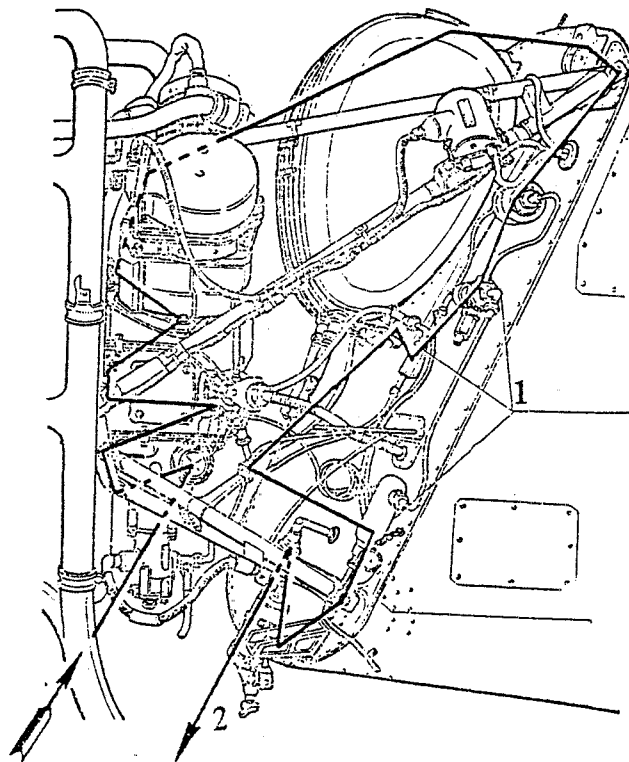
Inspection Circuit for Engine Rear Left Side
